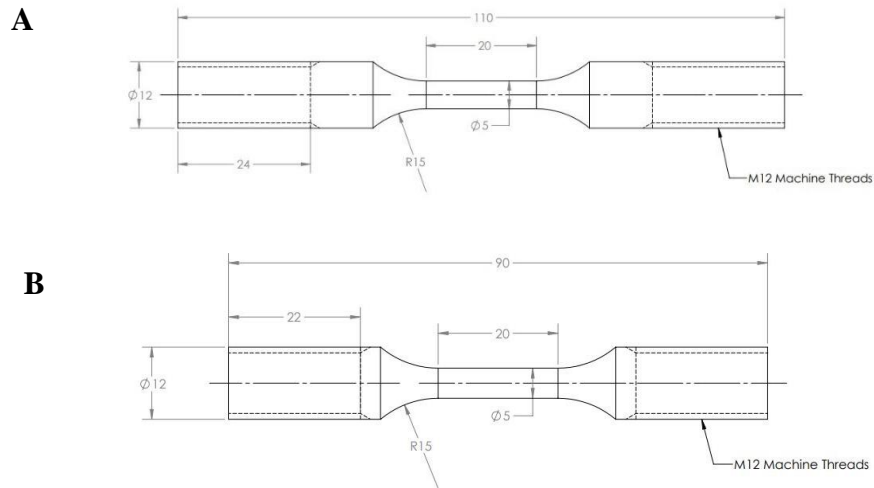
Fatigue specimen drawings: a) specimen with length 110 mm and b) specimen with length 90 mm.
